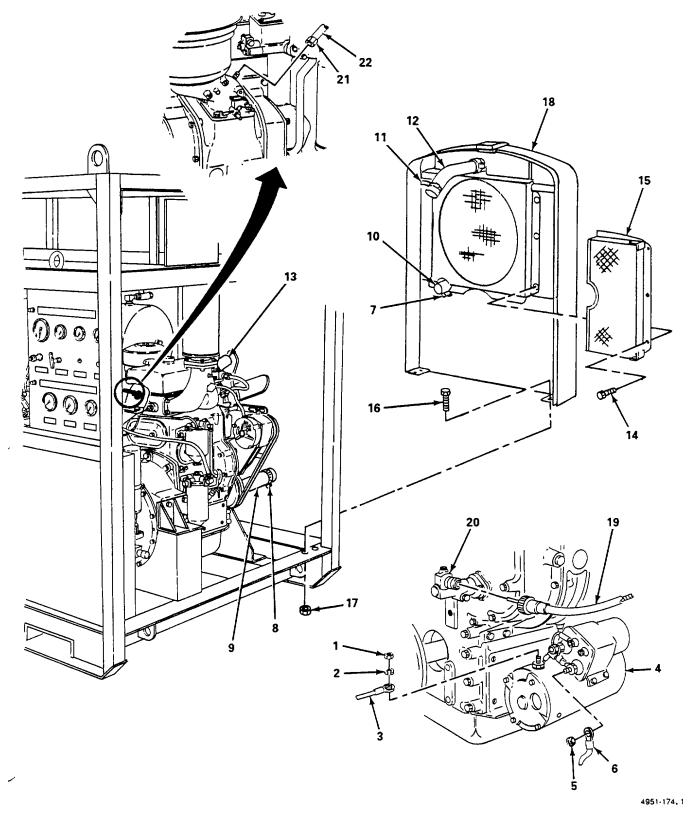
Engine Assembly, Installation (Sheet 4 of 4).
